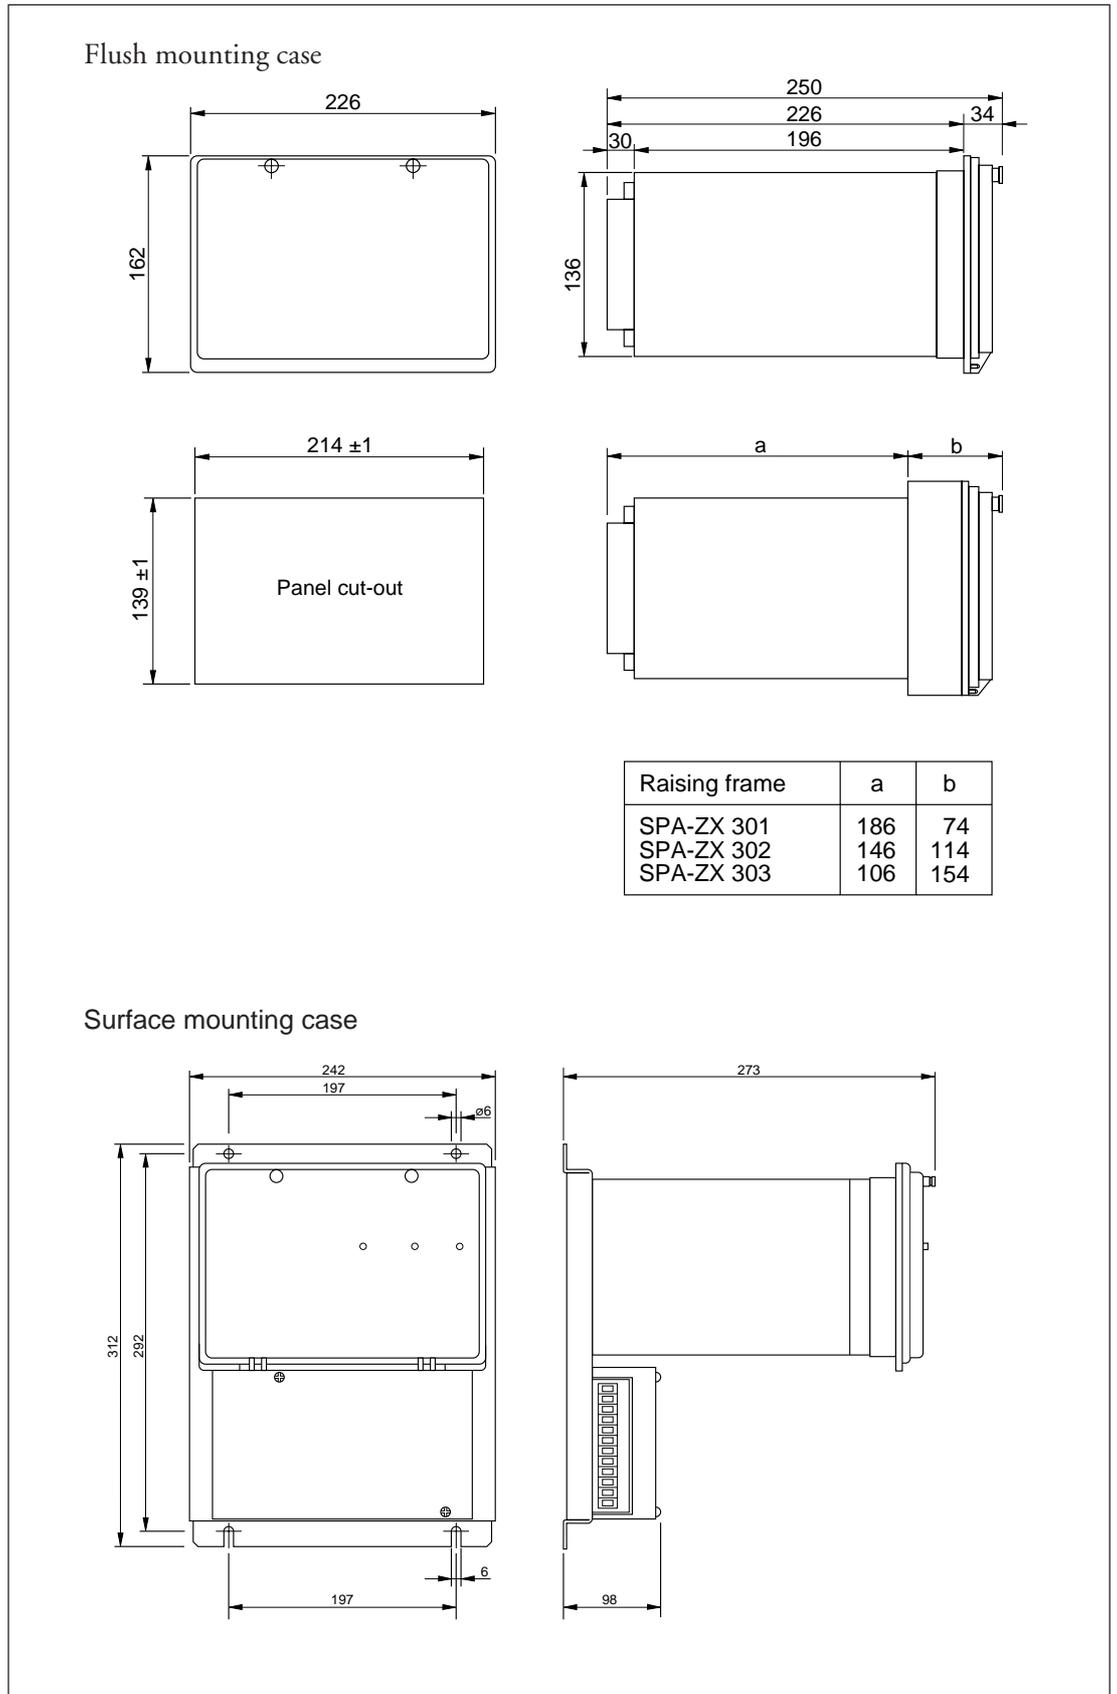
Mounting and dimension drawings of the motor protection terminal SPAC 320 C
